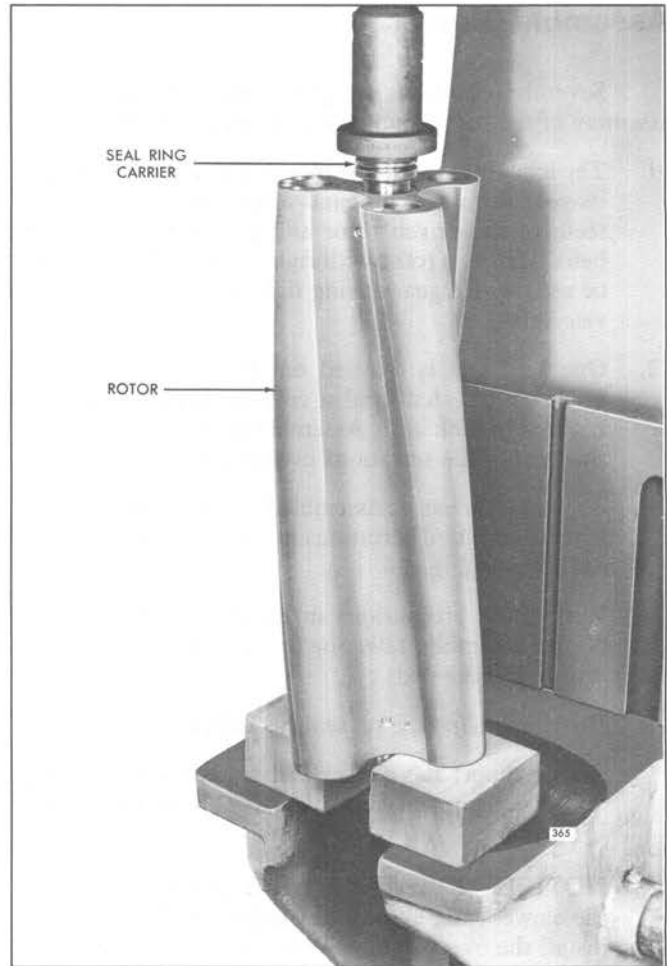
Installing Oil Seal Ring Carrier on Blower Rotor Shaft (V-92T Blowers) with Tool J 6270-4
